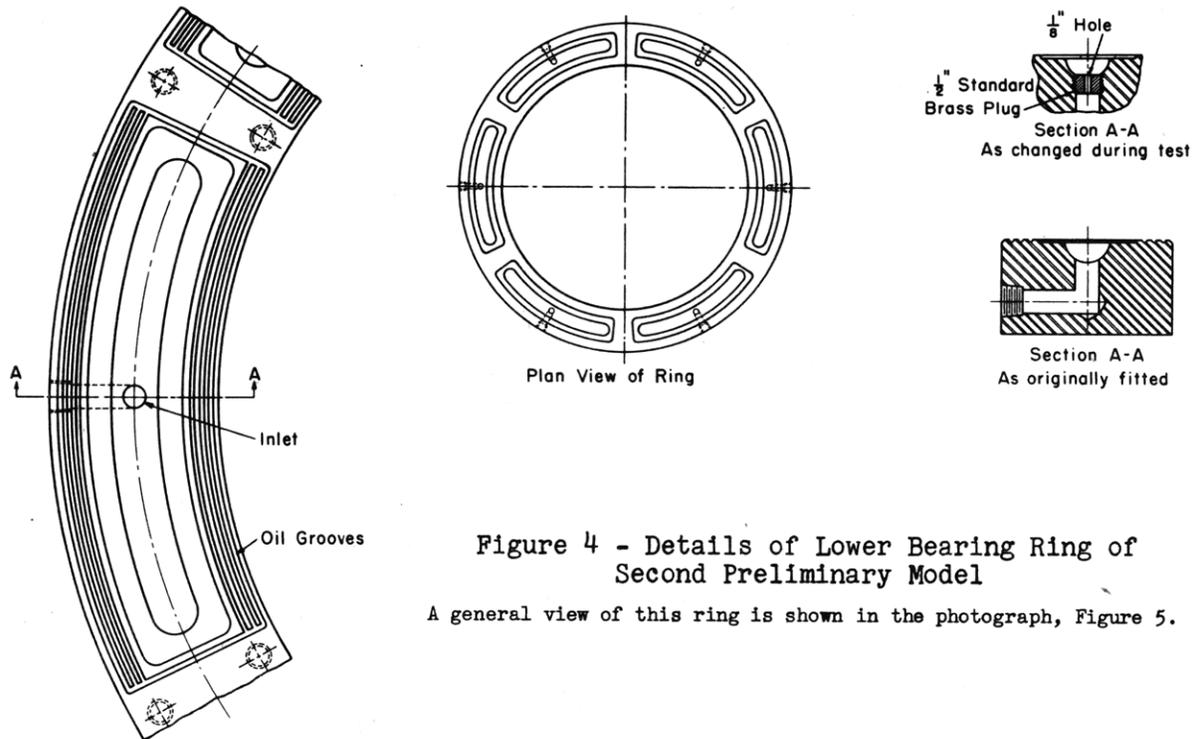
Details of Lower Bearing Ring of Second Preliminary Model
